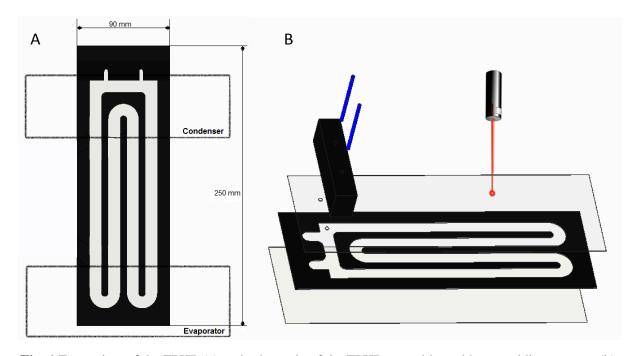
Front view of the FPHP (a) and schematic of the FPHP assembly and laser welding process (b).
